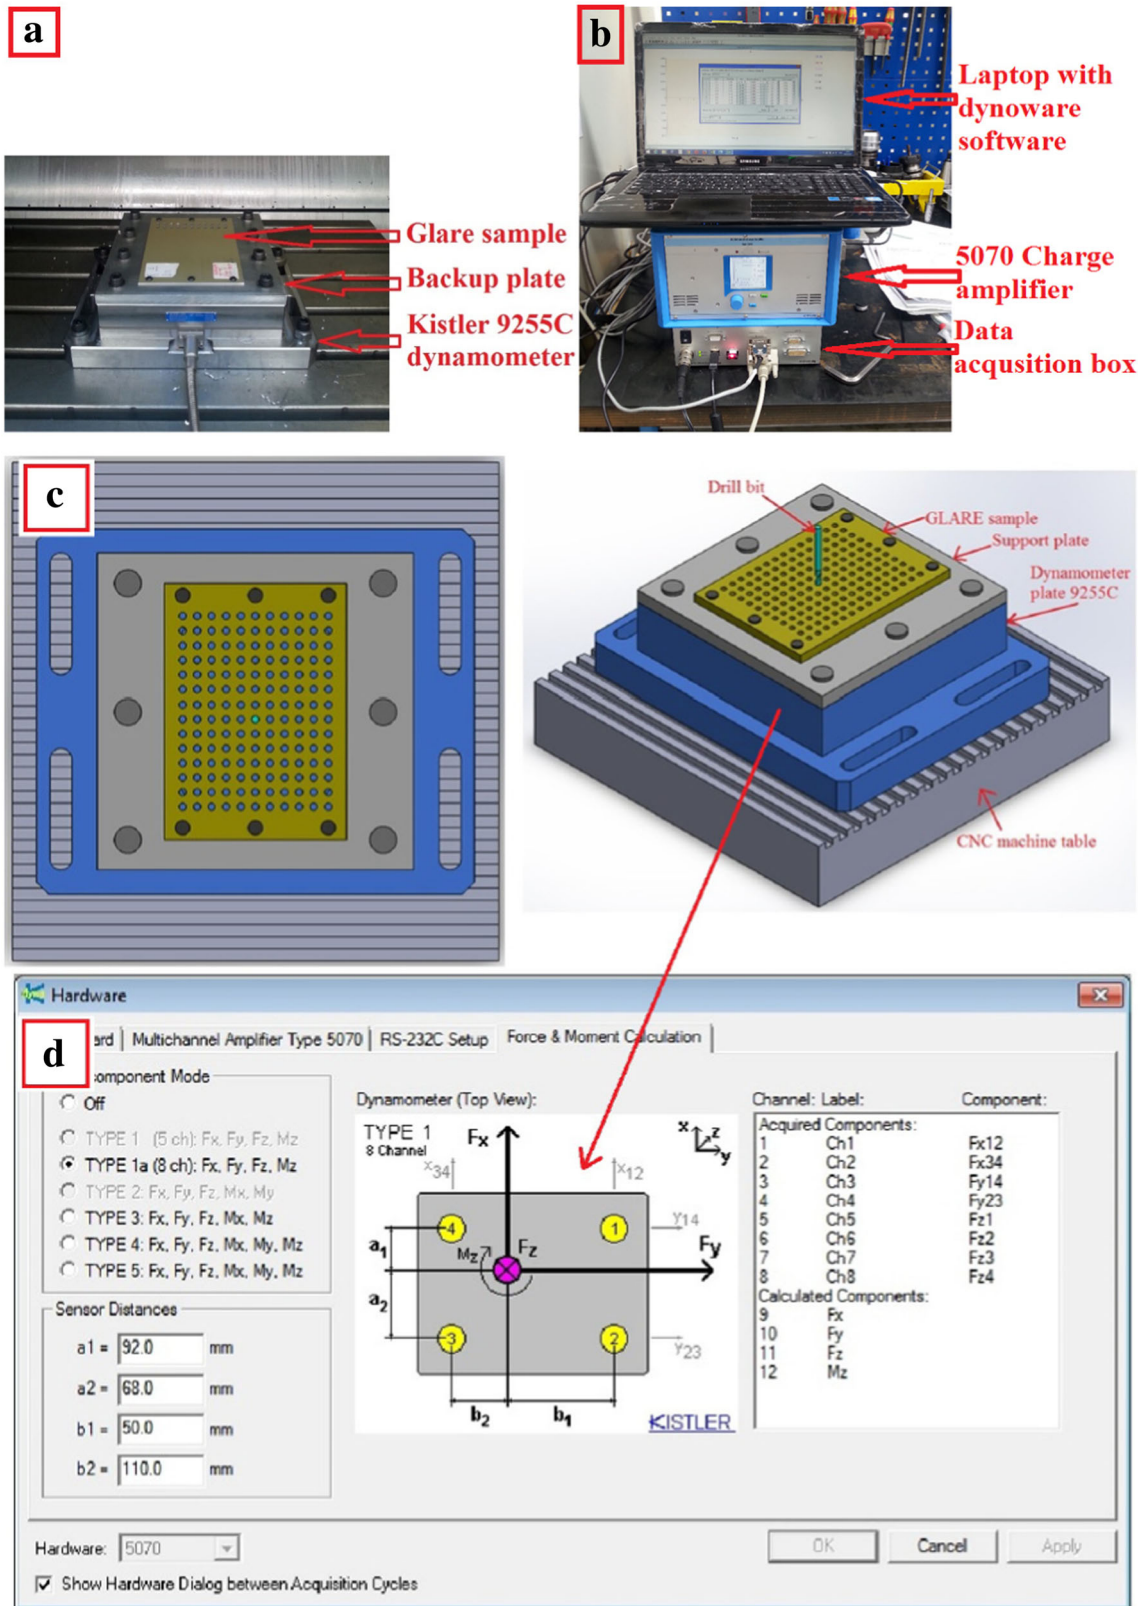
a Workpiece and dynamometer assembly inside CNC machine. b Dynamometer force measurement setup [9, 12, 59]. c 3D views of the setup of the dynamometer, the support plate, and the workpiece inside the CNC machine [59]. d DynoWare software torque calculations setup and data input [59]
